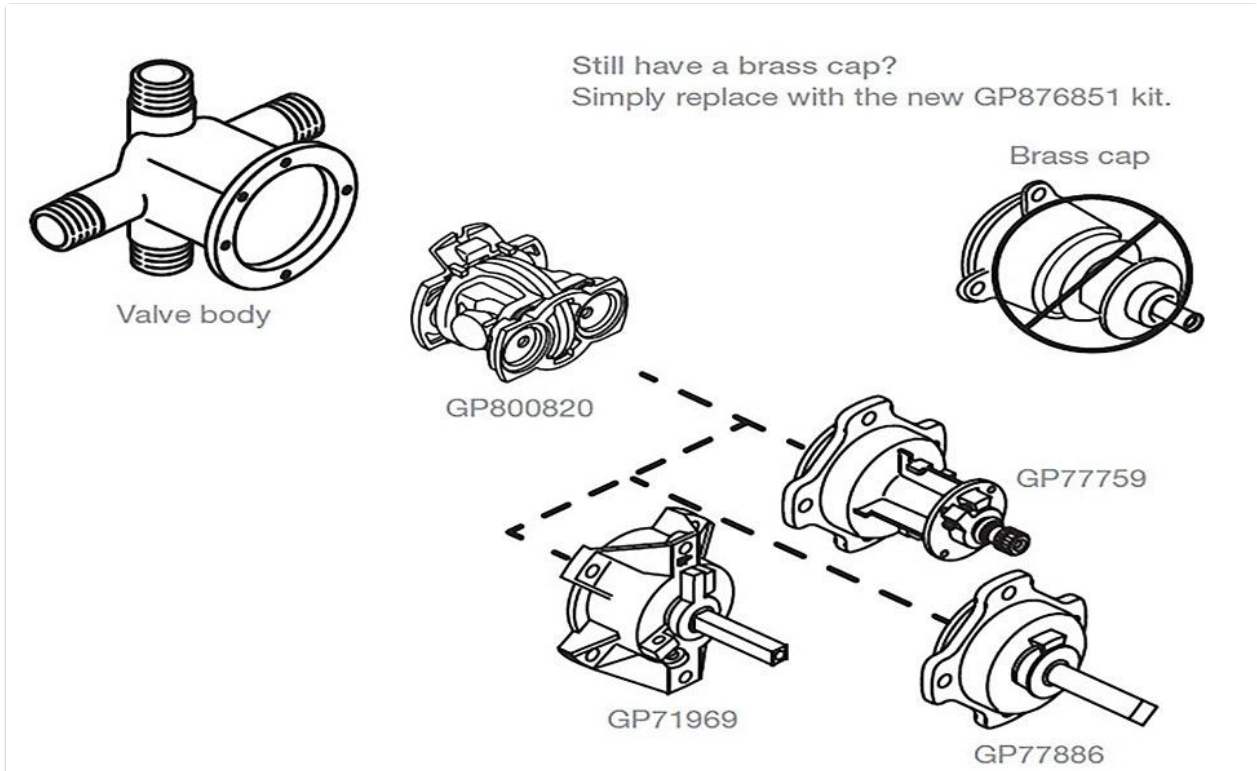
Exploded view diagram showing the valve body, GP800820 pressure-balancing unit, GP77759 mixer cap, and other related components for KOHLER shower valves.
